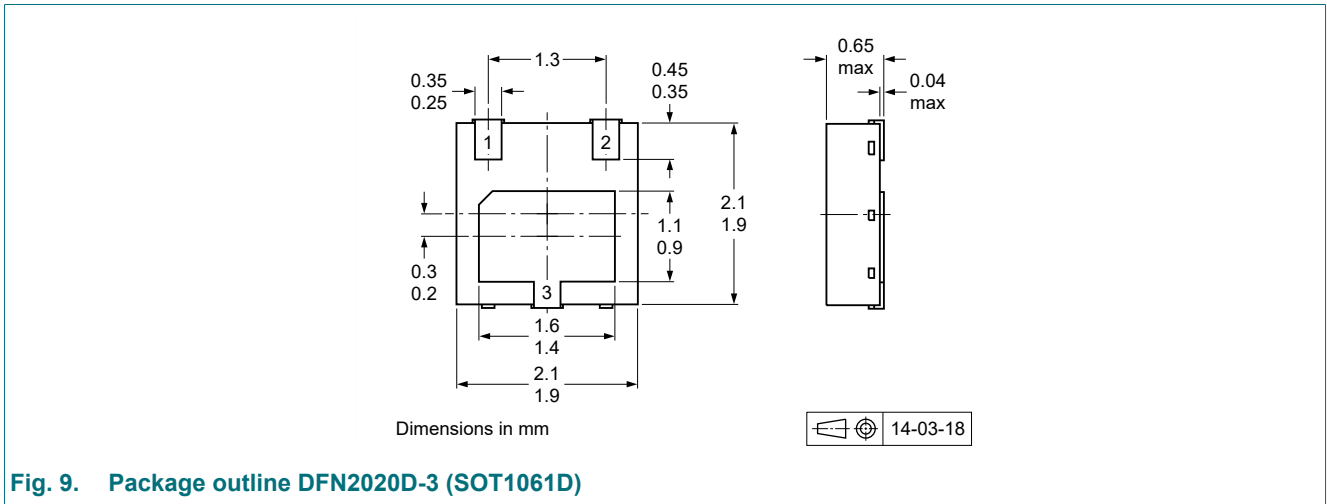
Package outline DFN2020D-3 (SOT1061D)
